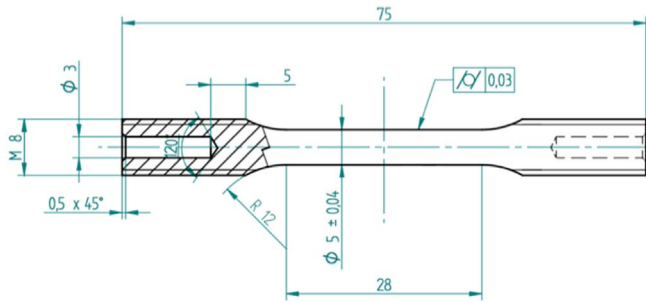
Geometry and dimensions [mm] of tensile specimens.
